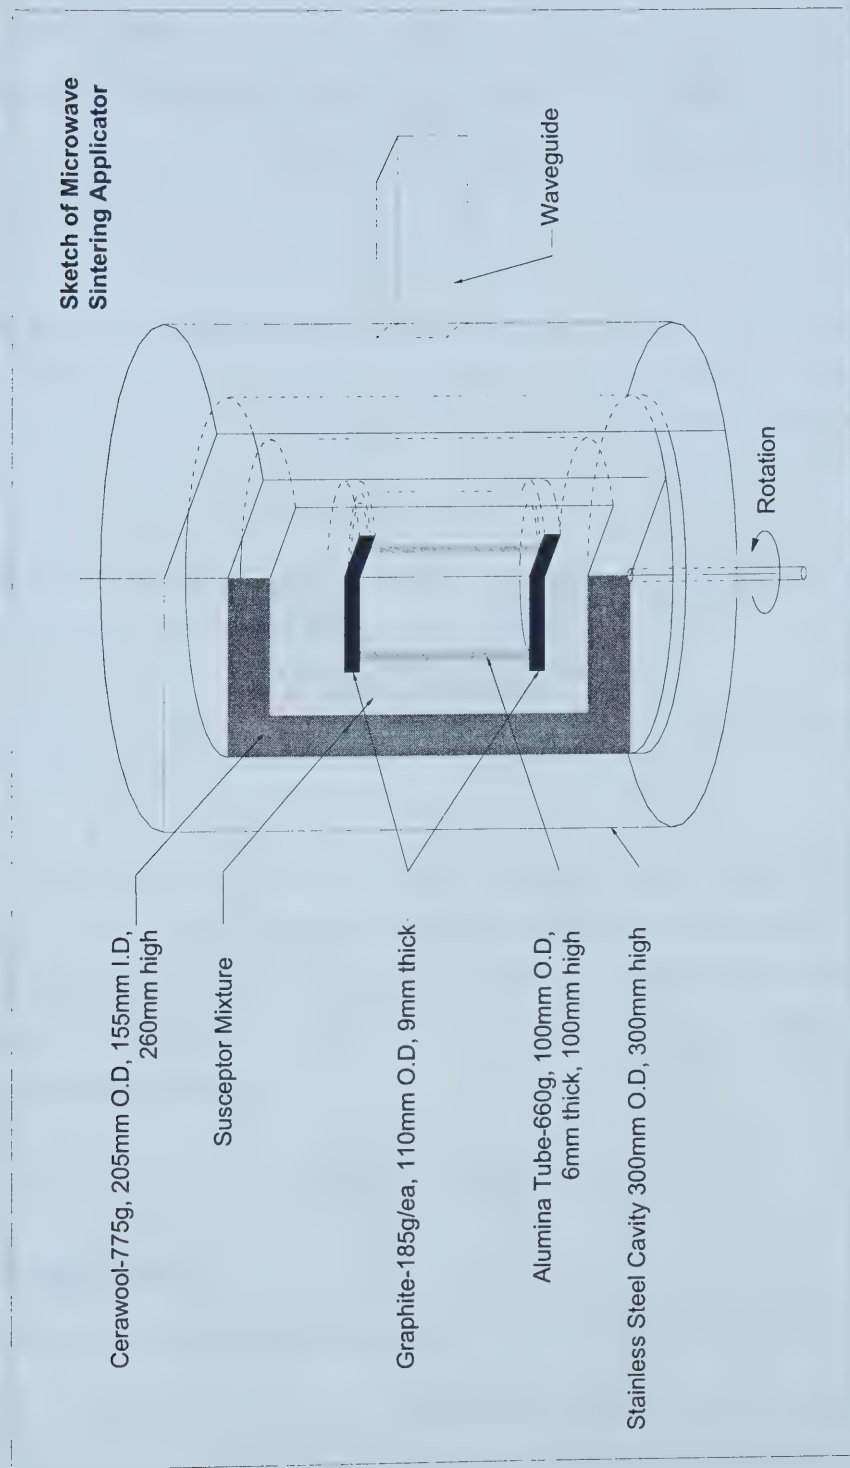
Microwave sintering applicator used by Indexable Cutting Tools.
